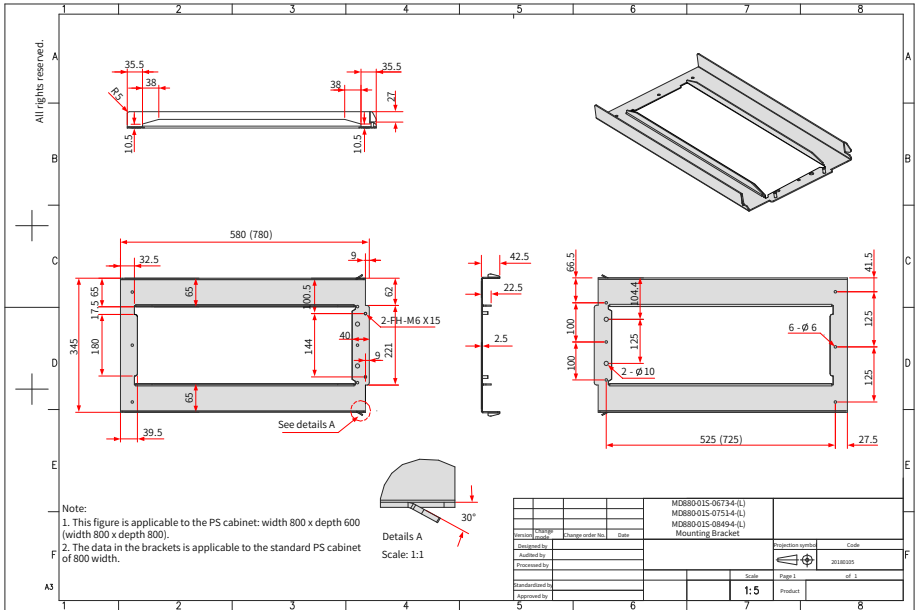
Mounting bracket dimensions of MD880-01S-06734-(L)~MD880-01S-08494-(L) (standard)
